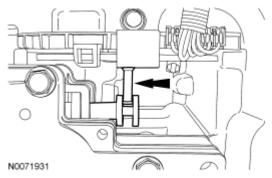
Identifying Manual Pin Courtesy of FORD MOTOR CO.
